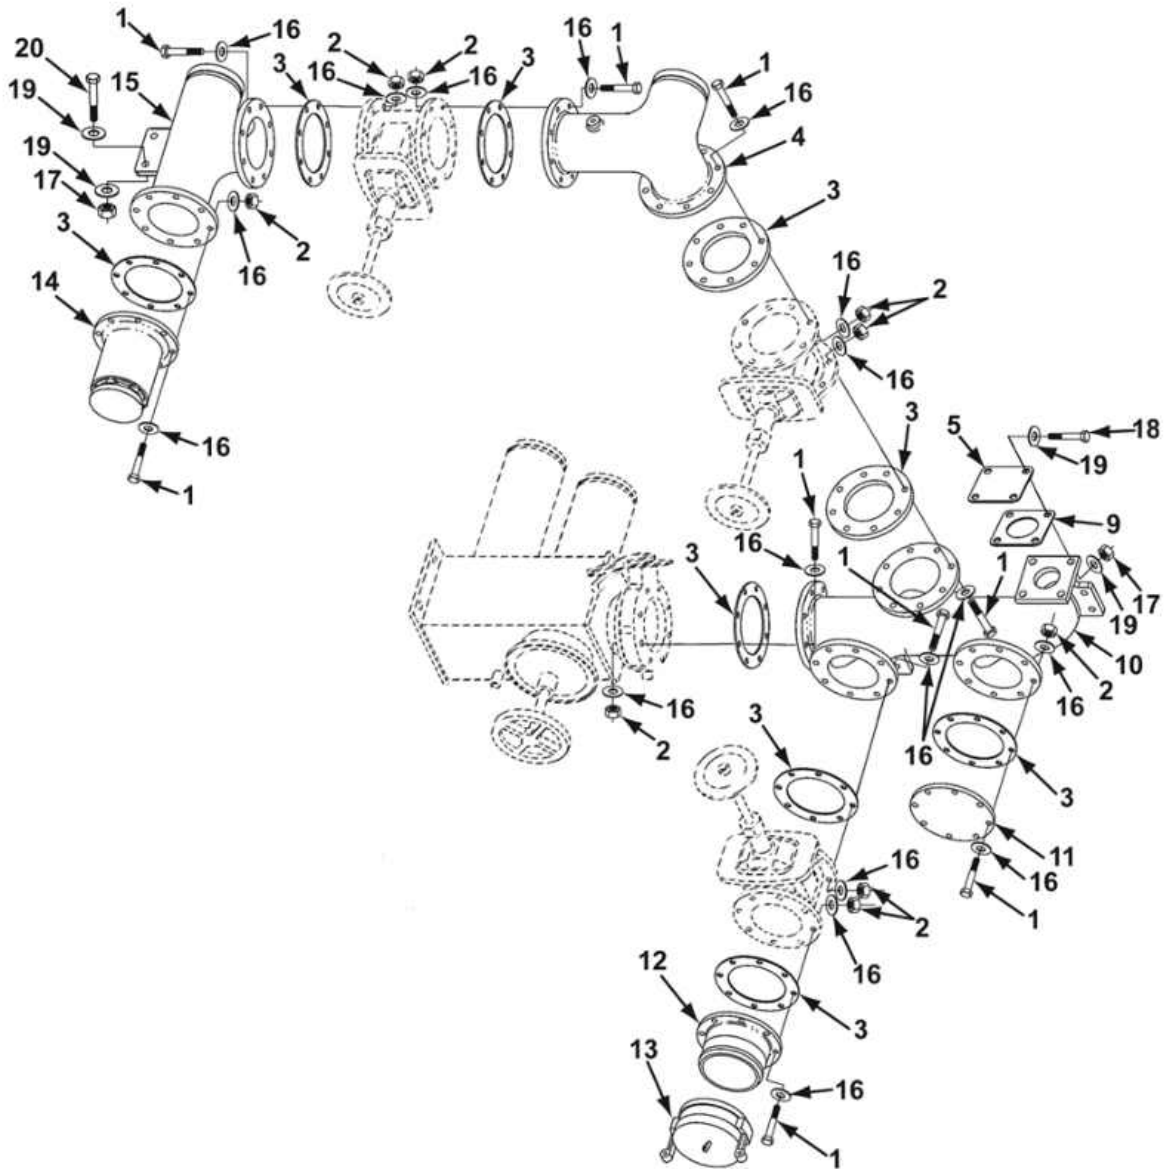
MANIFOLD AND FLANGE ASSEMBLY
